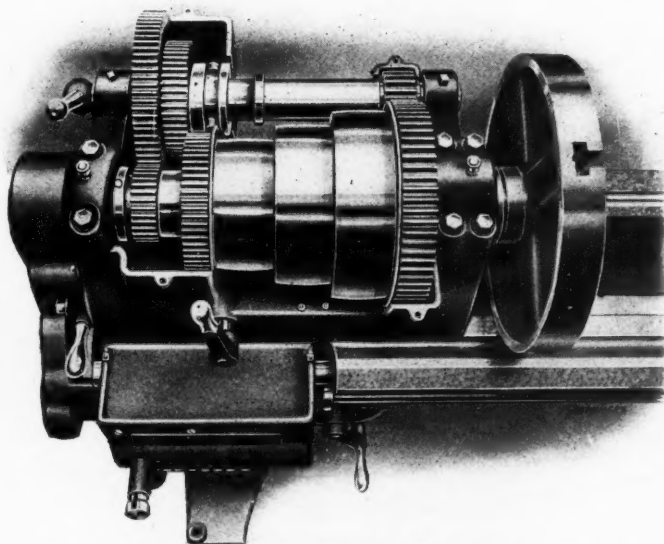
Gear Guard for Walcott Engine Lathes made Integral with Headstock
